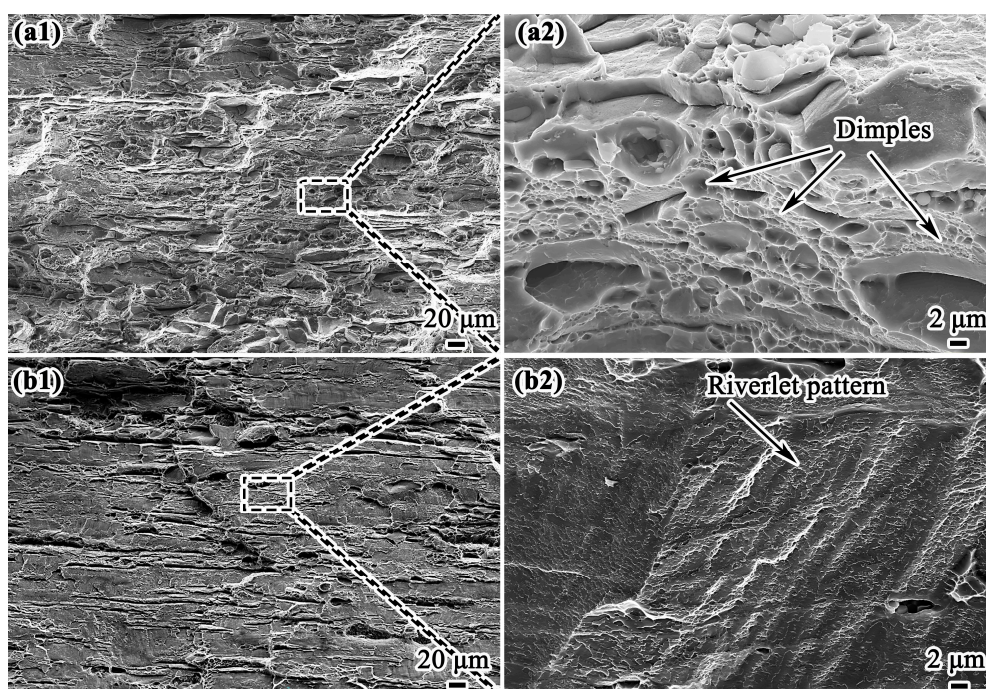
Fracture surfaces of the failed T6 specimens: (a1,a2) MSR₁; (b1,b2) CHR.
